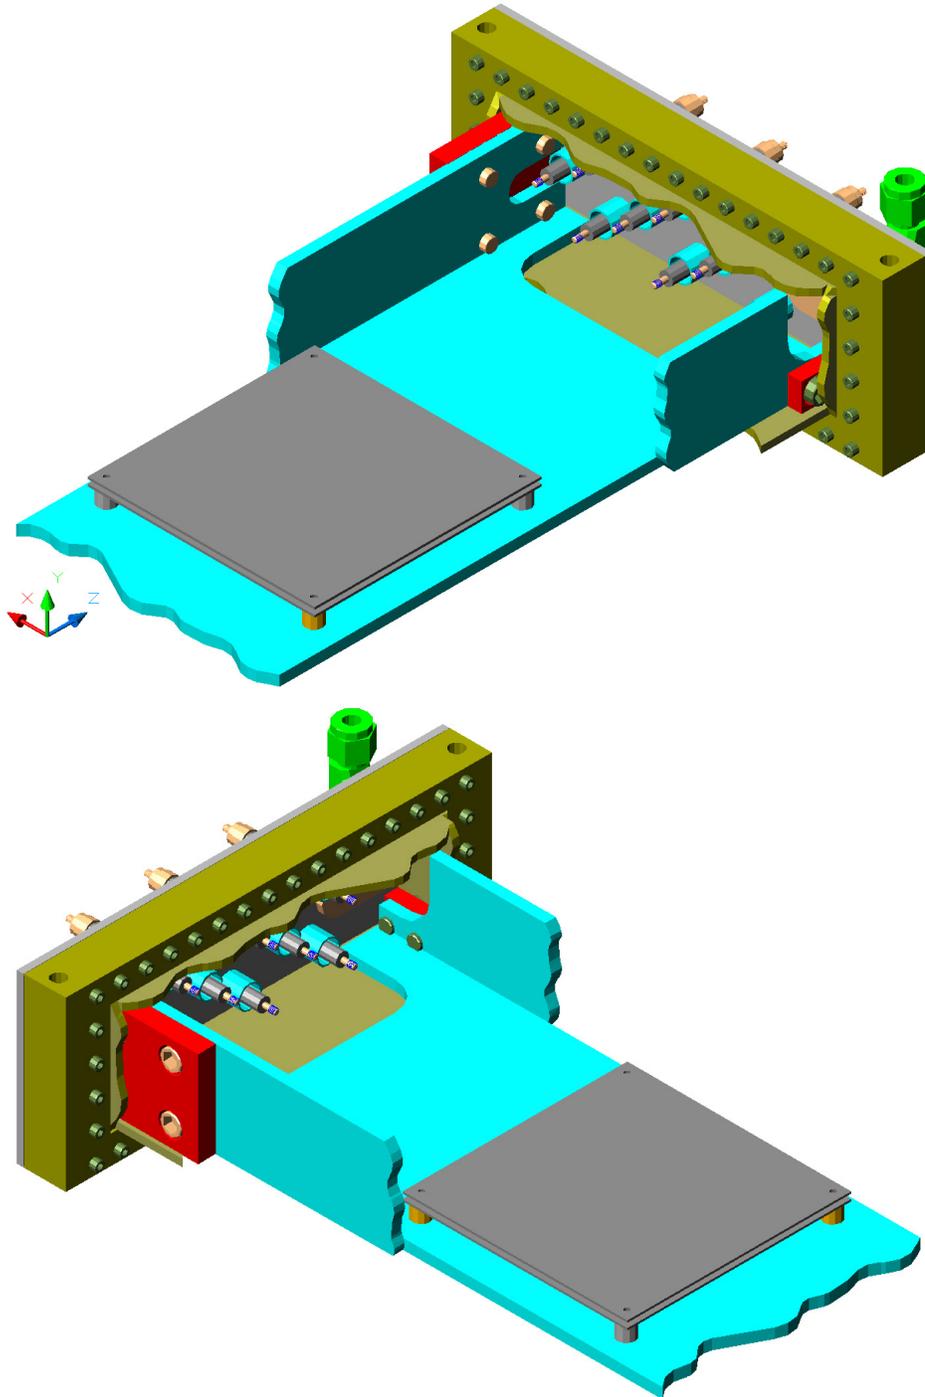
Two cutaway views of the “U” shaped channel on the “B” end, which is bolted to the nearby endplate. The channel is shown in light blue, the endplate is shown in dark gray. Two plates welded to the endplate are shown in red, and these have countersunk holes for bolts to attach to the channel. The 6” by 2” tube and its endflange is also shown (in mustard brown). Note that the heads of the bolts which secure the endplate to the endflange are seen in these views (ie: the endplate is tapped).
